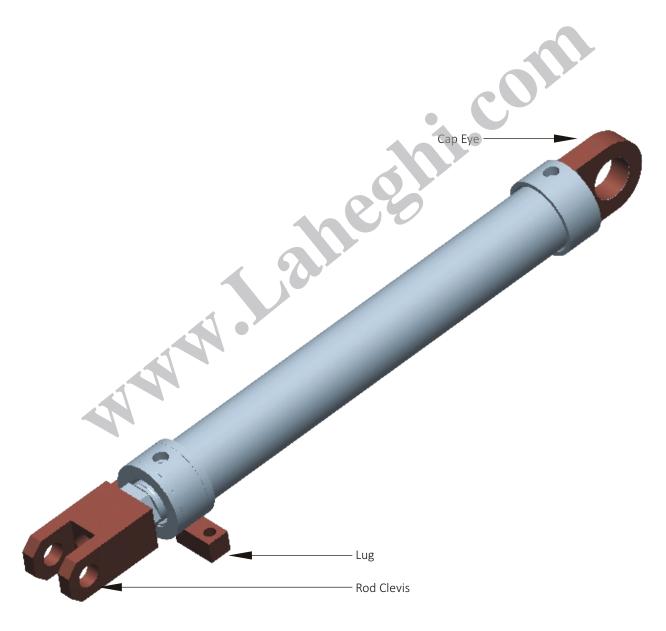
Foot and Clevis mounted Hydraulic cylinder Bore ø 250mm x Piston Rod ø 180mm x Stroke 6250 mm manufactured for several steel mills in India and abroad for Roll change application.
